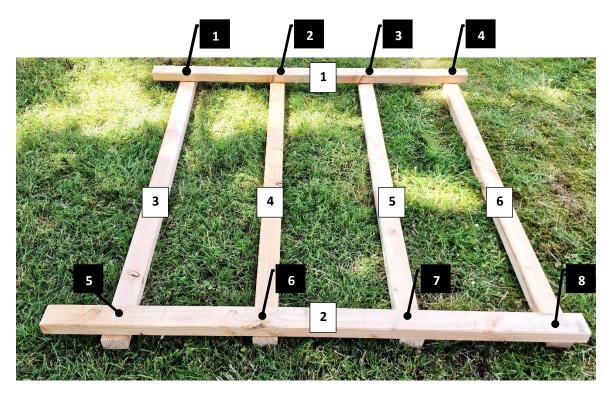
Assembly of the back frame using the wooden beams (1-6) and the screws (position 1-8).
